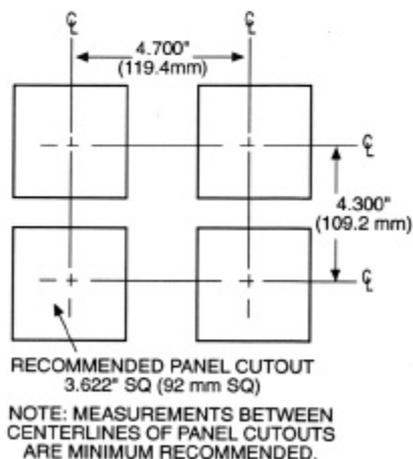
Panel Cutout Dimensions, 1/4 DIN
